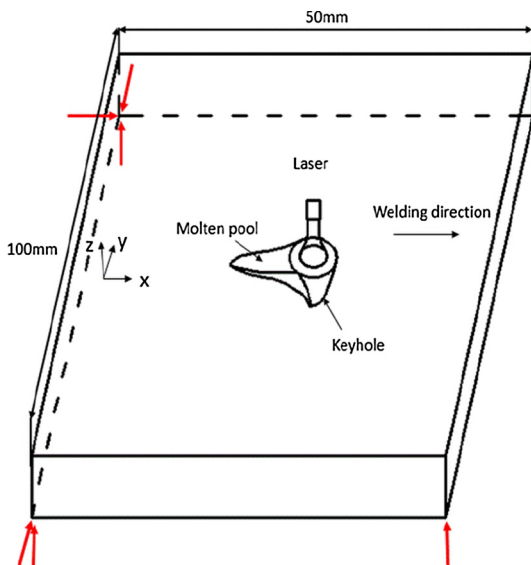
Schematic of laser welding and mechanical boundary condition.
